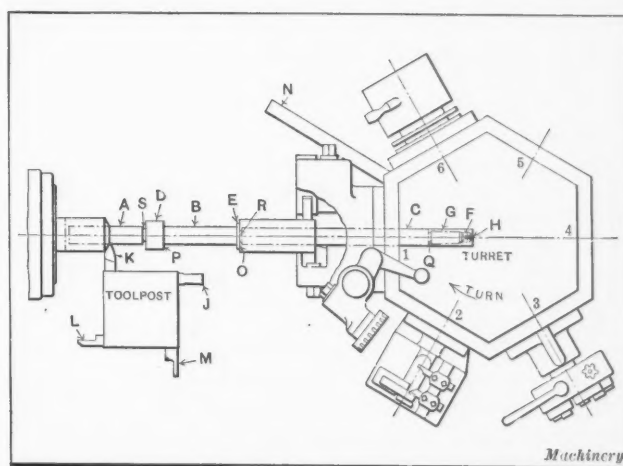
Equipment for producing Pinion-shaft shown in Fig. 24
